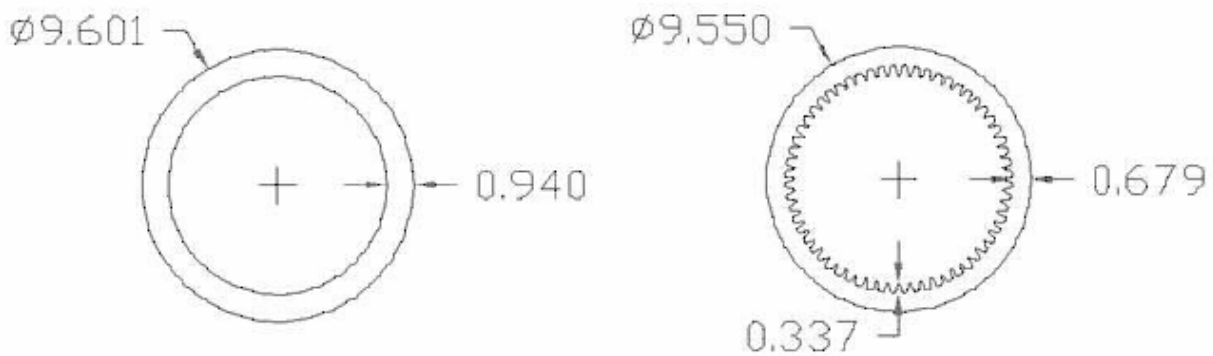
Schematic of tube geometry (dimensions in inches)
